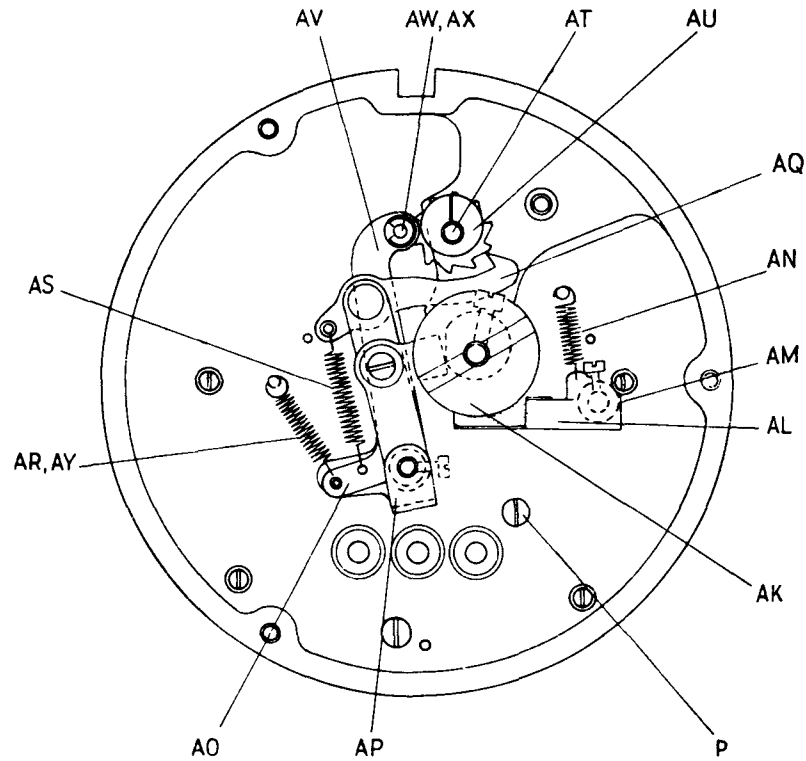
TRANSMITTER HEAD C.P. (REAR VIEW)
